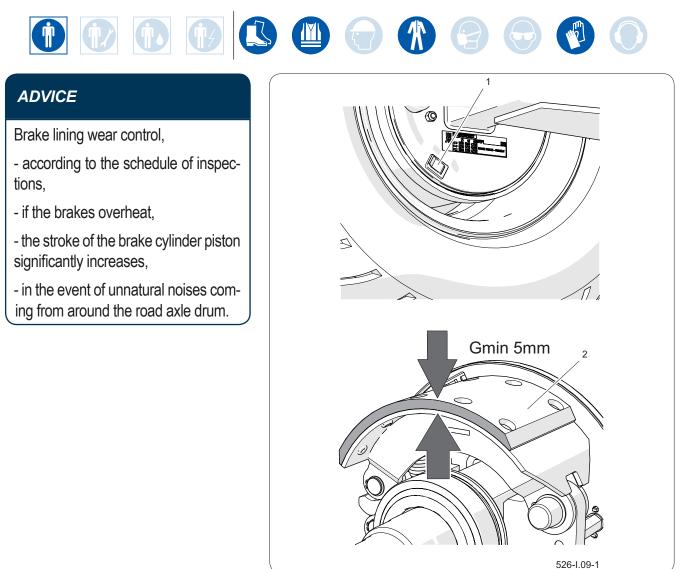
Checking the brake lining thickness (1) blanking plug (2) brake lining
